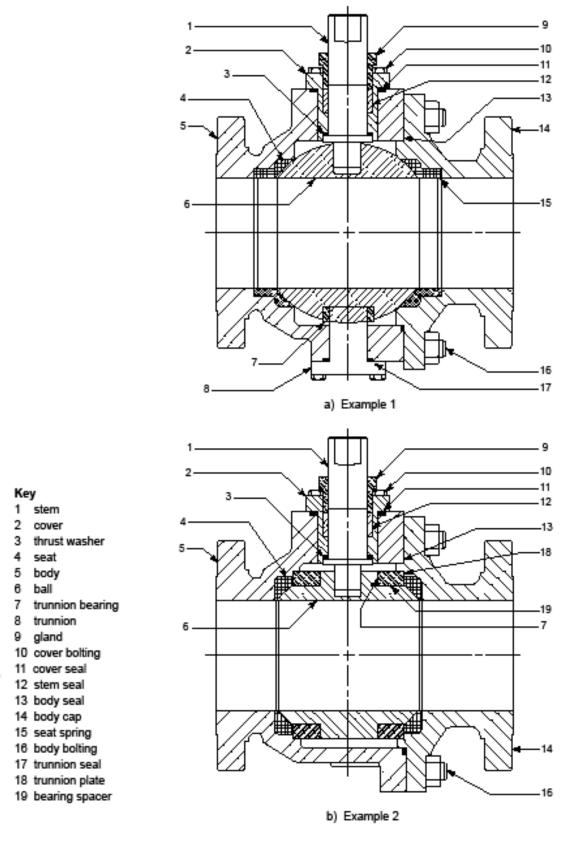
Typical Trunnion-mounted Ball Valve Components (Split-body Valve Illustrated)—
